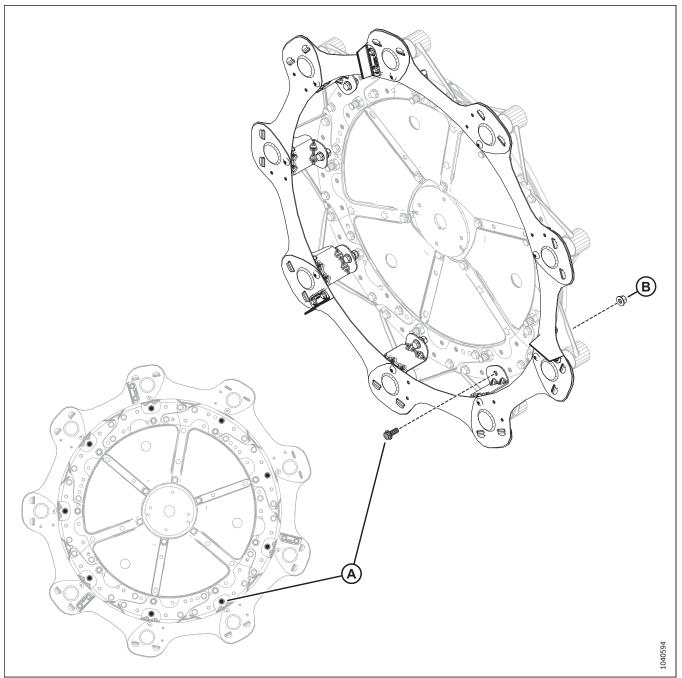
Nine-Bat Reel – Initial Endshield Assembly
